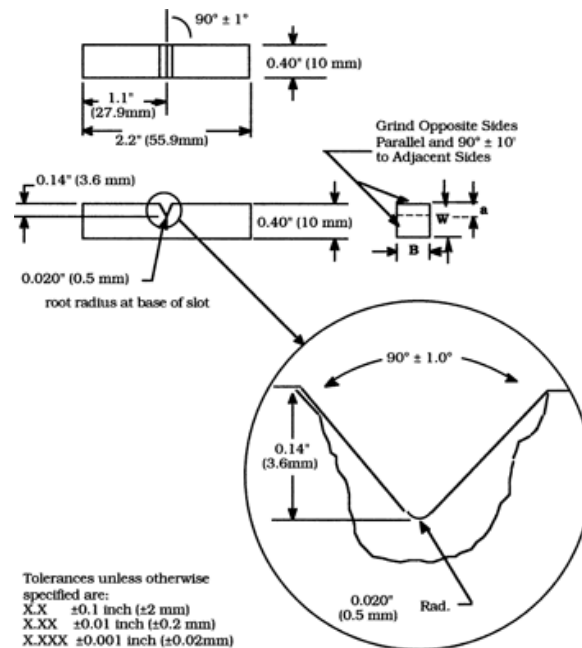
4 - point bend sample per ASTM F-519 [86].
